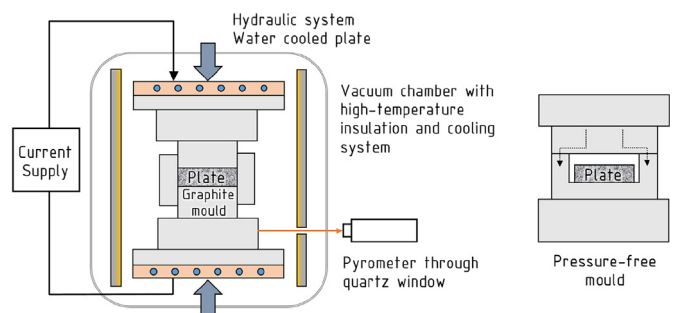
Schematic of the sintering machine used. Once sintered, the pressure-free mould is used for the post-sintering cycle. (A colour version of this figure can be viewed online.)
